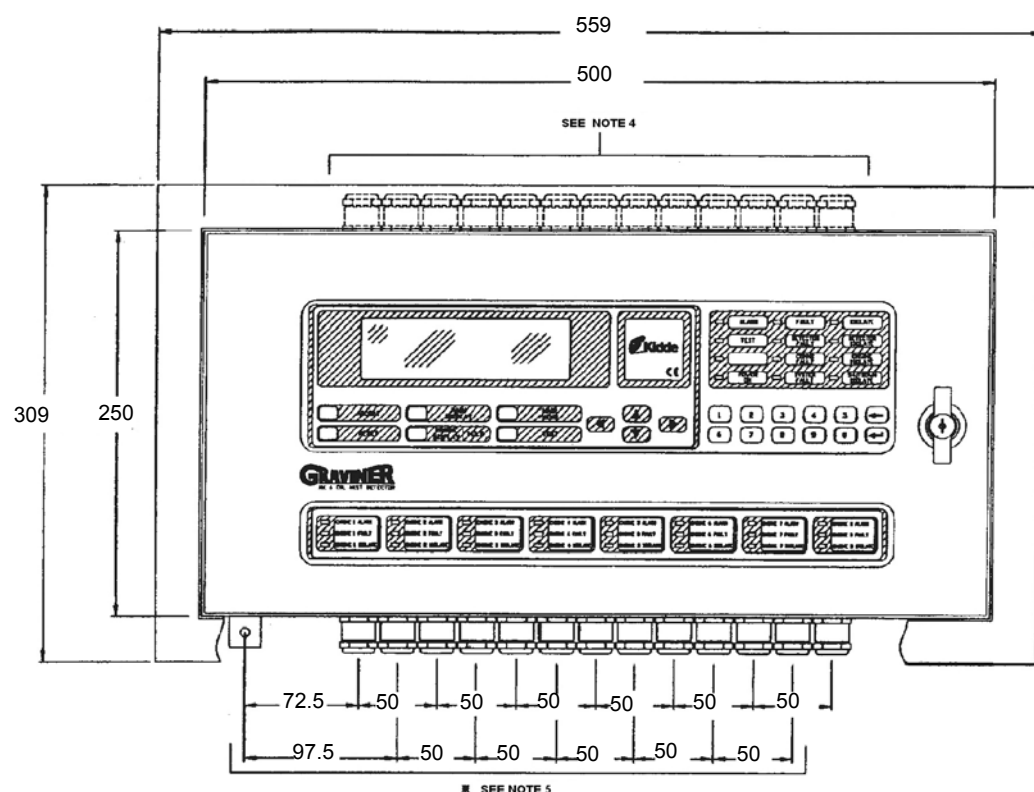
Installation Drawing for Graviner Mk 6 OMD Control Unit Bulkhead Mounting
